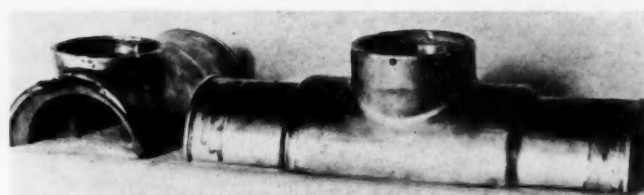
Failure of a Third Type of Hub on the Testing Machine
